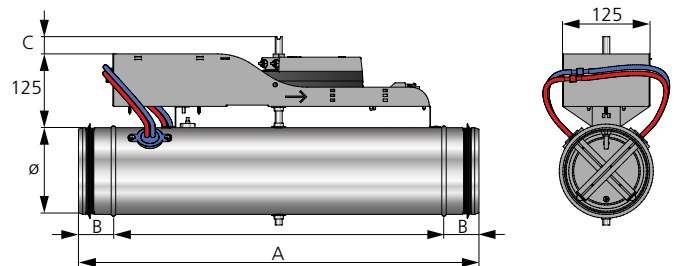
Dimensions, WISE Damper circular and WISE Damper circular with spring return.
